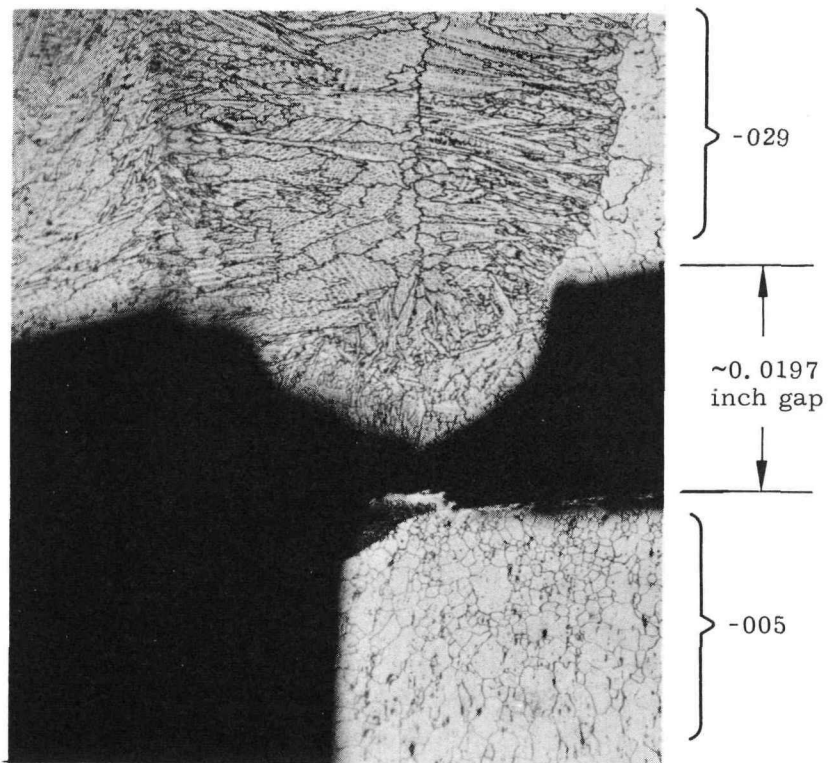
EB WELD DEFECT SHOWING POOR FIT-UP IN SPECIMEN 1; MAGN 64X
